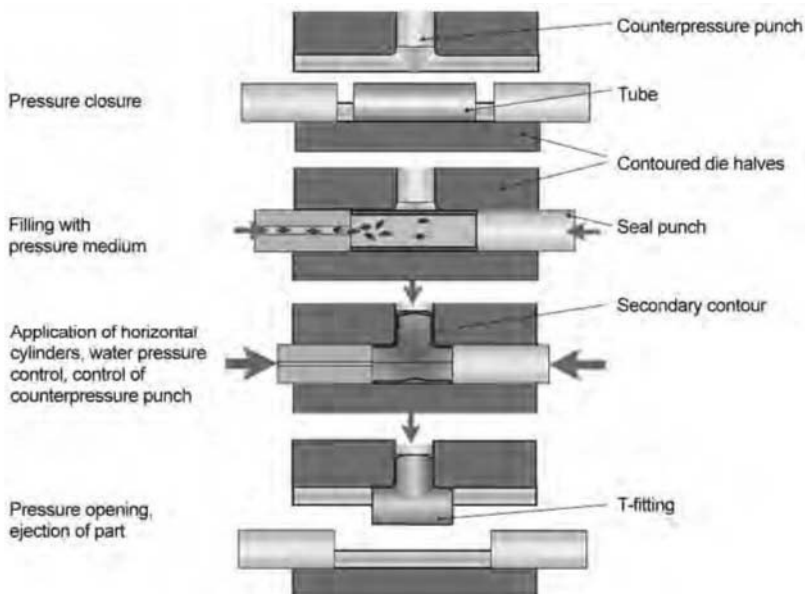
Tube hydroforming with axial feed and internal pressure. Source: Ref 2.4
